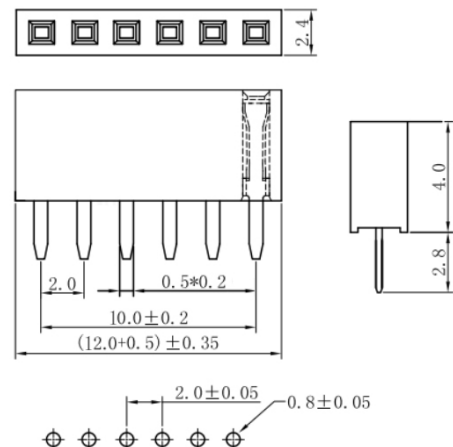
Mechanical Dimensions of ATDSC2MM6P
